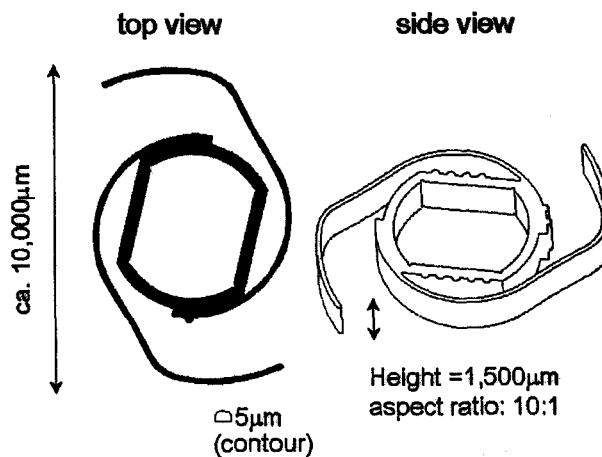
Drawing of the LIGA spring. Note the large overall size, the high aspect ratio and the small tolerances required.
